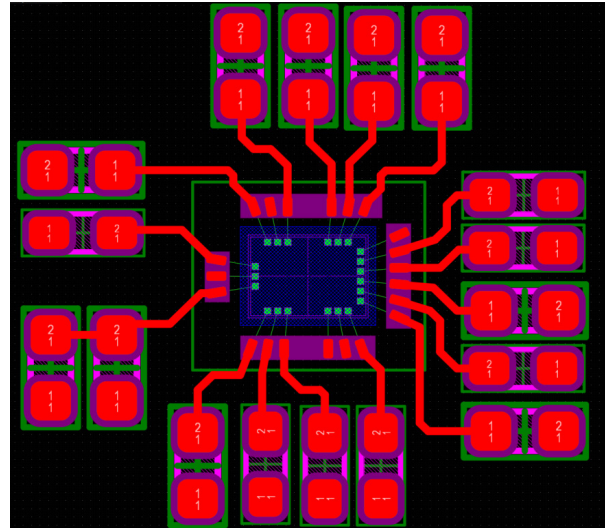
The COB with wire bonding design example in Altium Designer (Pre-AD2X)
